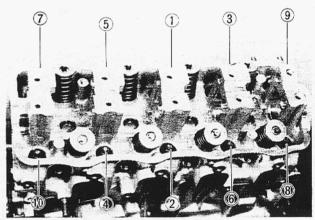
Tightening sequence of cylinder head bolts
